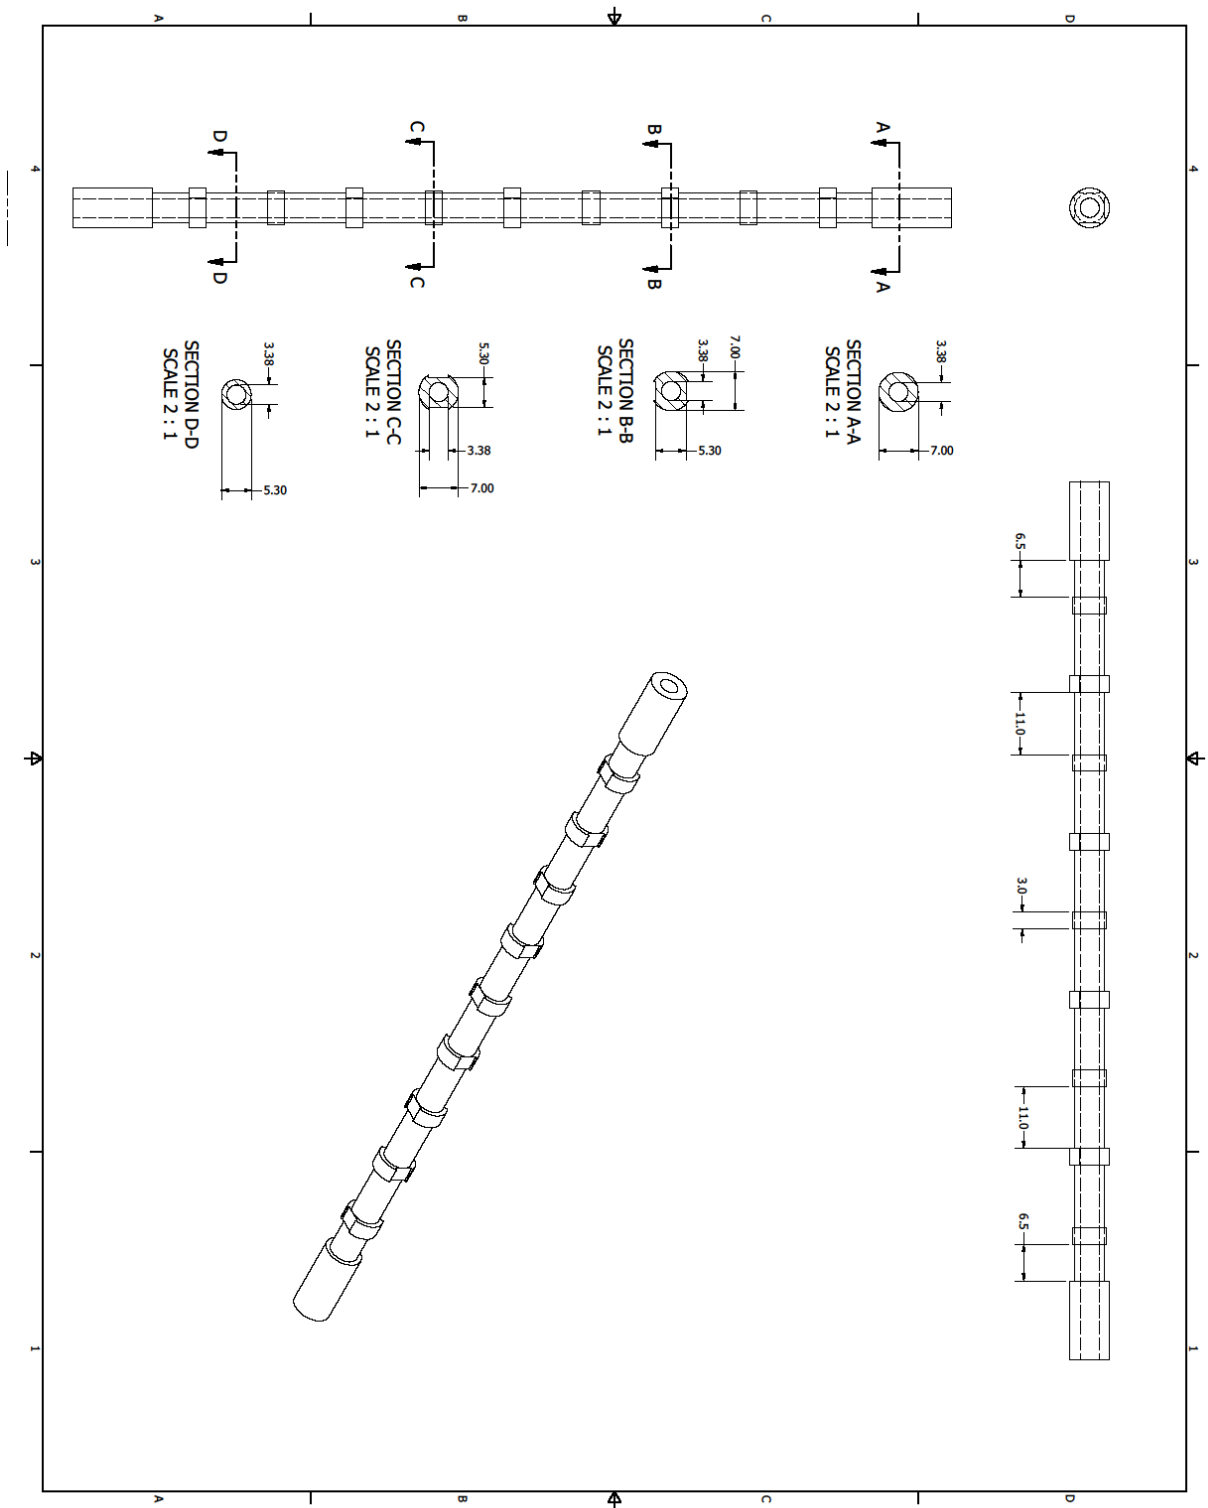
Technical drawings of a sub-sector of the second heat exchanger
